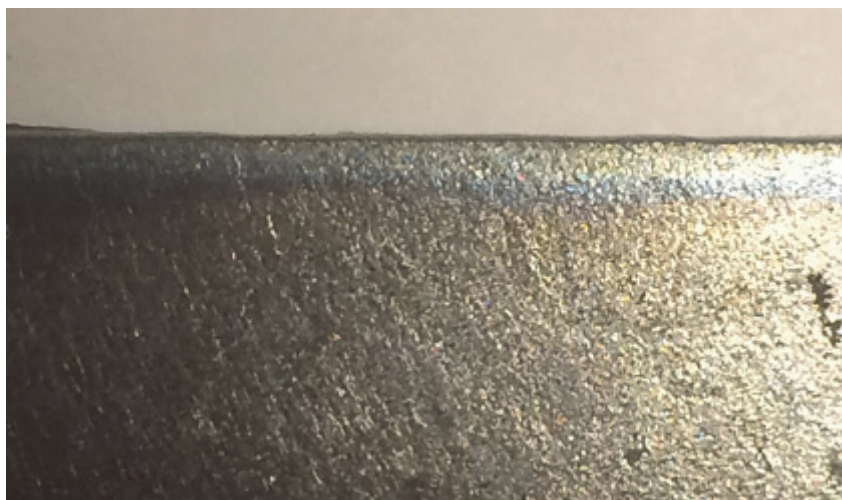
A general view of a common flail mounted on the hole, made with laser cutting (photo by Z. Jarmoliński)
